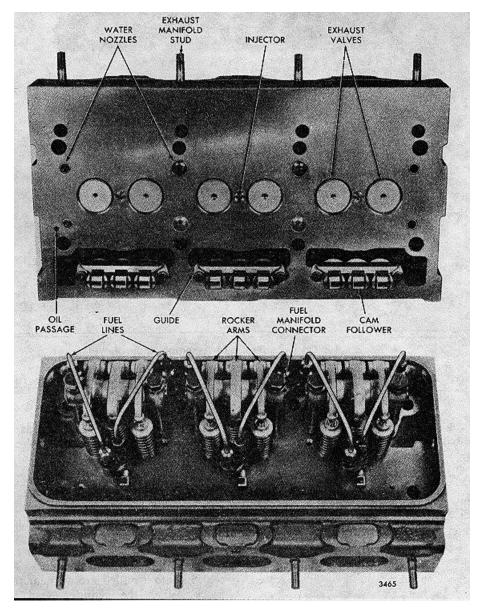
Typical Cylinder Head Assembly (Two-Valve)
